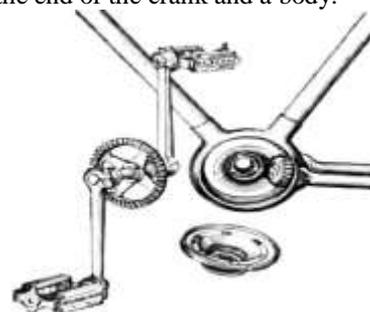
A sketch of pedal crank mounted on ring bevel ring and drive shaft bevel gear
